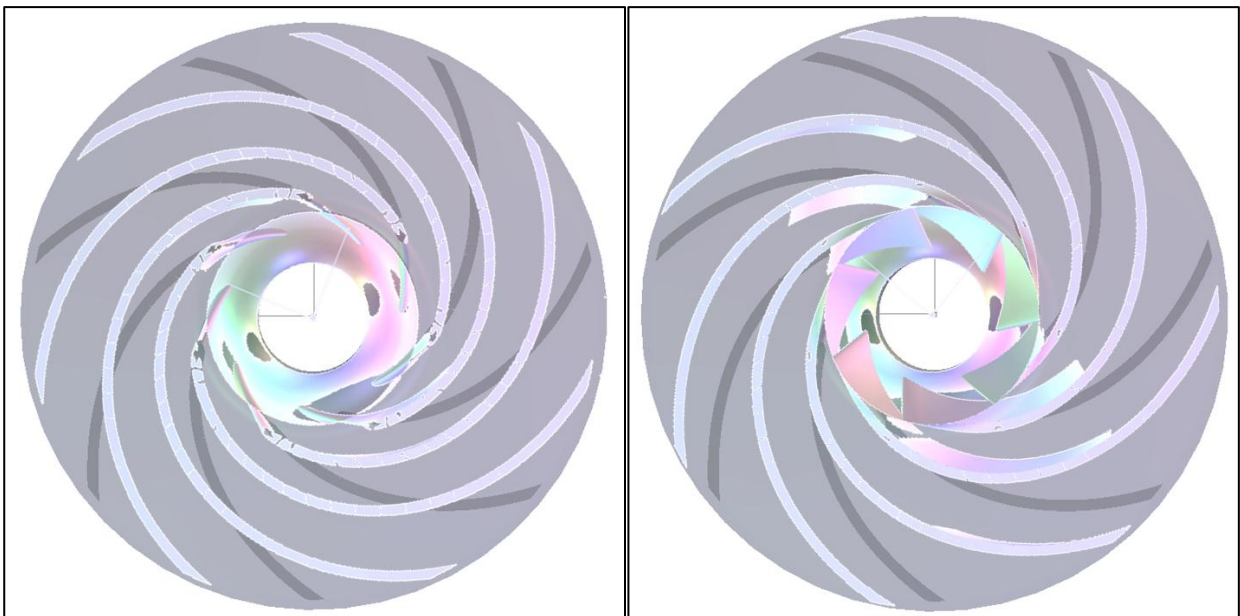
Geometry of impellers Version10 (left) and Version8 (right) confronted with the original impeller.
